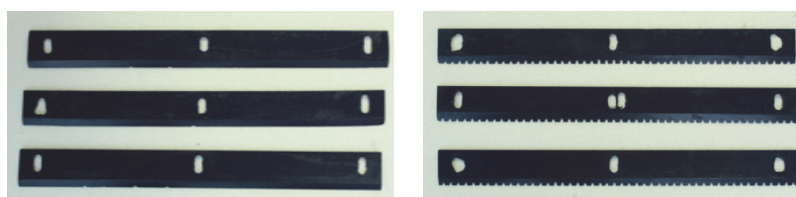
Blade types; Smooth edge (left), Serrated edge (right)
